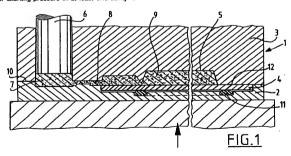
shows a moulding apparatus 1 in which a carrier 4 is received between two mould parts 2. 3. on which carrier is arranged a chip for moulding (not shown in this figure). In the upper mould part 3 is arranged a mould cavity 5 in which a covering element 9 can be arranged through a runner 8 by exerting pressure on moulding material 7 using a plunger 6. In order to prevent moulding material 7 leaking to the outside at a parting 10 between the mould parts 2, 3, the mould halves 2, 3 must connect together precisely. For this purpose the mould parts 2, 3 are pressed against each other with a predetermined force F. To now also ensure that the carrier 4 is enclosed non-movably between the mould parts 2, 3, i.e irrespective of differences in thickness of the carrier 4, a compensation element in the form of a spring ring 11 is arranged in the lower mould part 2. This spring ring 11 presses the carrier 4 against a peripheral edge 12 of the upper mould part 3.
